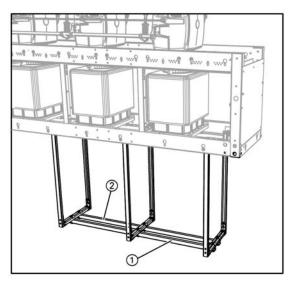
Mounting the C-rails at the cable brackets (representation without 4MC4 current transformer)
